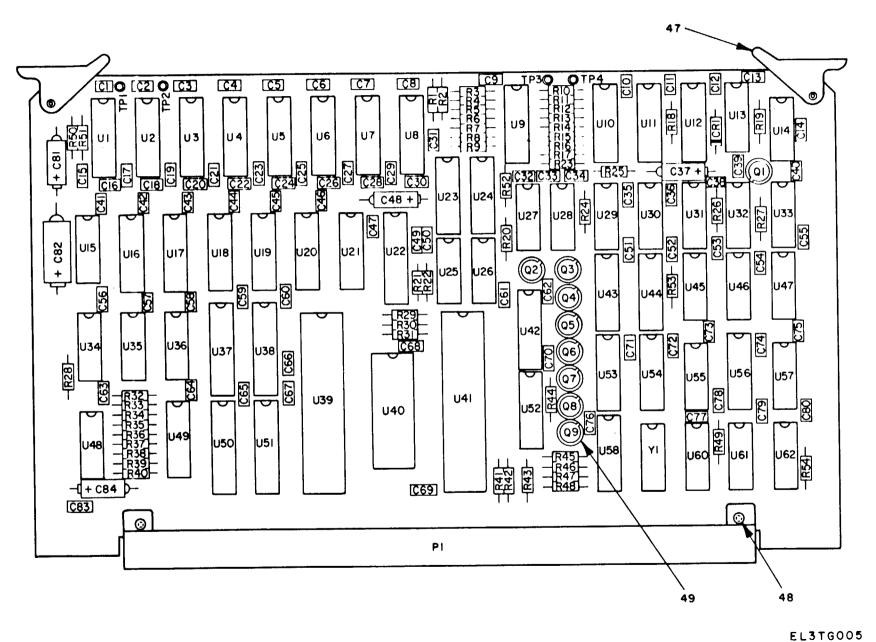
Circuit Card Assembly, CPU (3A1A1) (Sheet 1 of 2)
